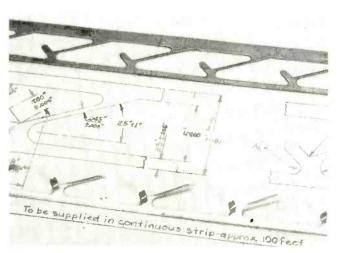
Filament bus strips as blanked (top) and trimmed for use
